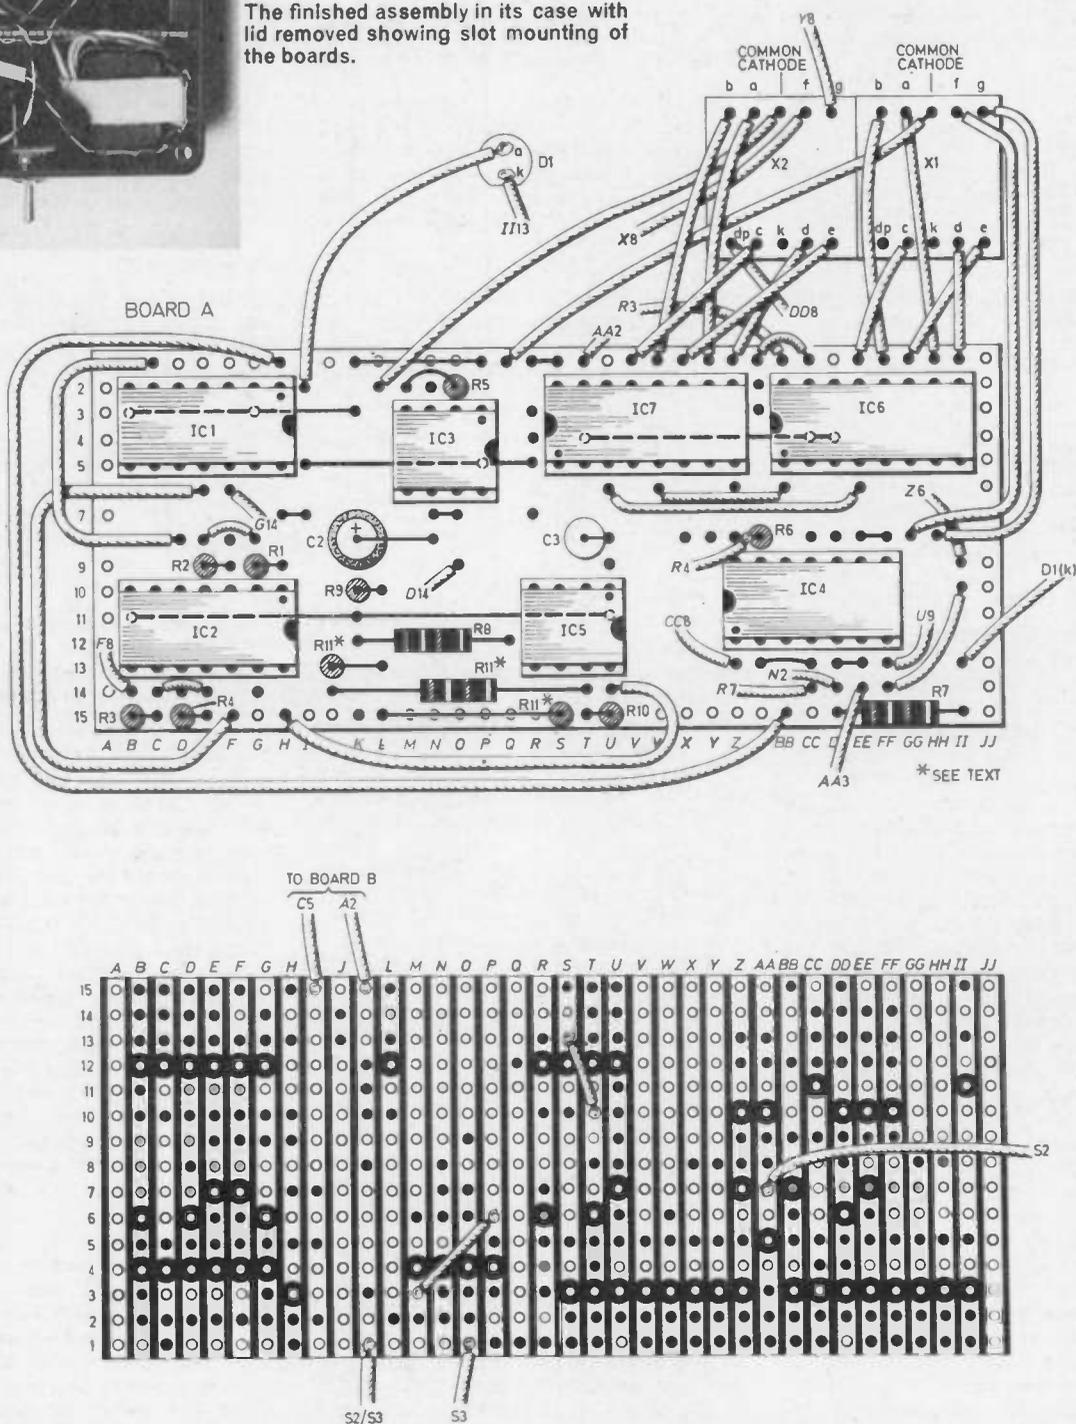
(upper) The layout of the components and link wires on the topside of the stripboard with wiring to opto devices. Note that some link wires share a locating hole; (lower) the breaks and connections to be made on the track side of the stripboard.
